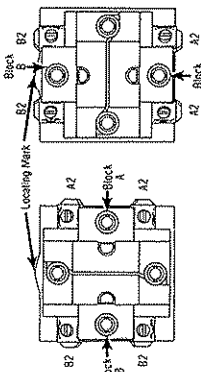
WIRE CHANNELS LOCATED ON TOP AND BOTTOM CONTACT BLOCK POSITION (Rear View)
